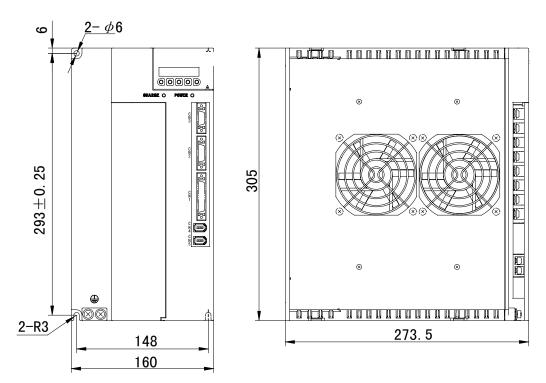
GS3100, GS3148, GS4100, GS4148 Series installation dimension (Unit: mm)
